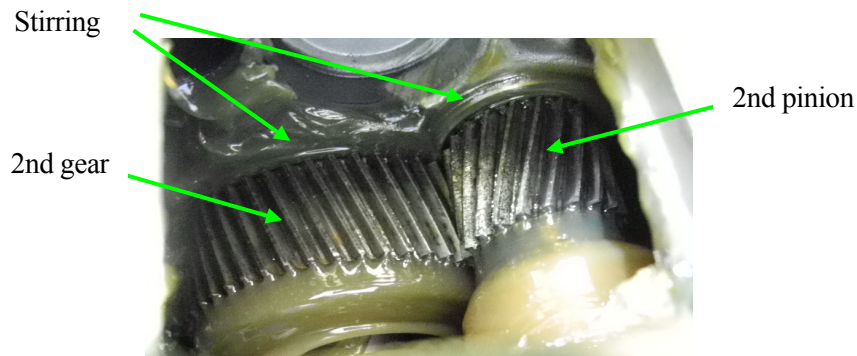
State of tooth flank and grease after driving, MA-1, application on tooth flank
